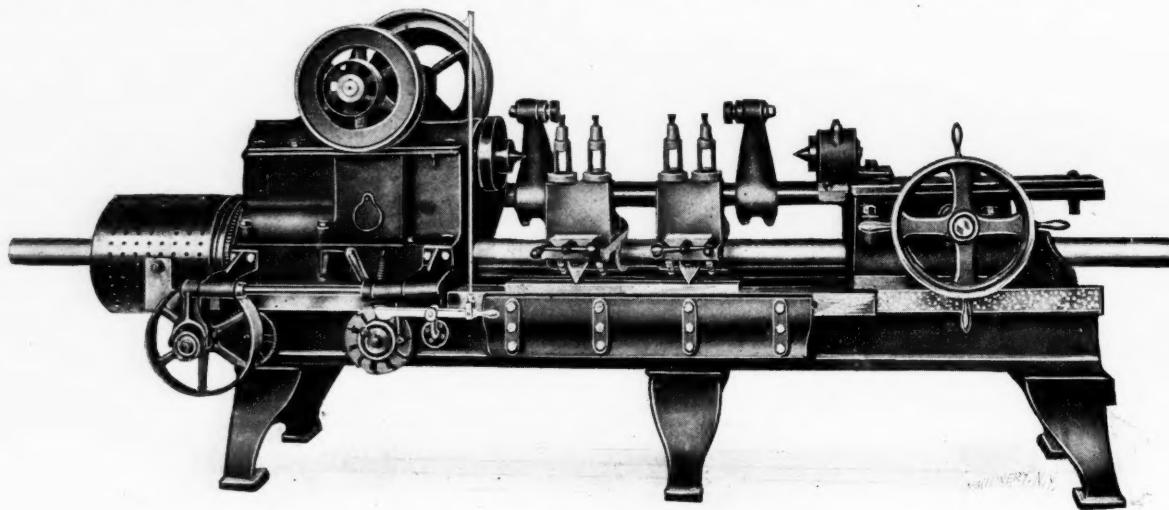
An Automatic Lathe for Turning Pulleys, Gear Blanks, etc., on Centers
